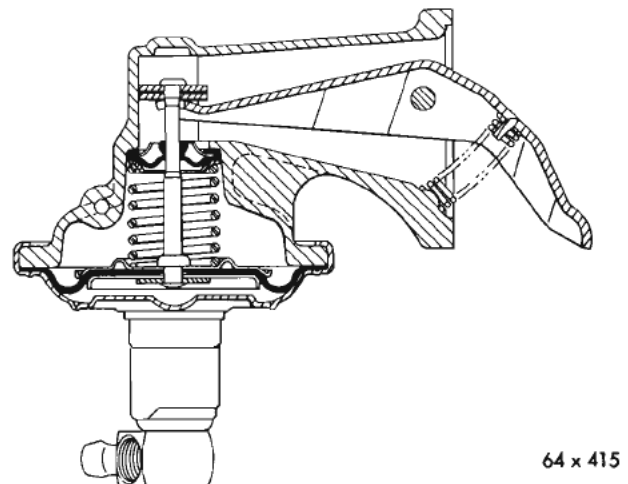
Fuel Pump Assembly (361, 383 and 426 Cu. In. Eng.)
